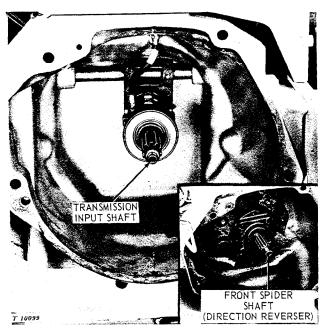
Transmission Input Shaft Indexing Point
